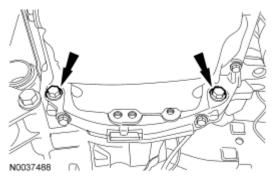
Locating RH Halfshaft Courtesy of FORD MOTOR CO.
